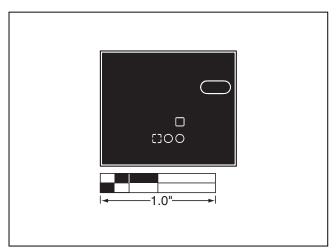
MAX2204 EV Kit Component Placement Guide—Secondary/Bottom Component Side
